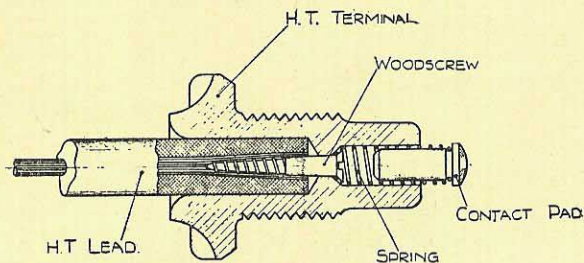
HIGH-TENSION PICK-UP ASSEMBLY.
